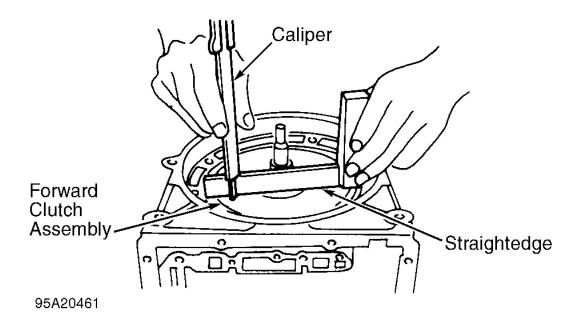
Measuring Forward Clutch Installation Depth Courtesy of ISUZU MOTOR CO.
